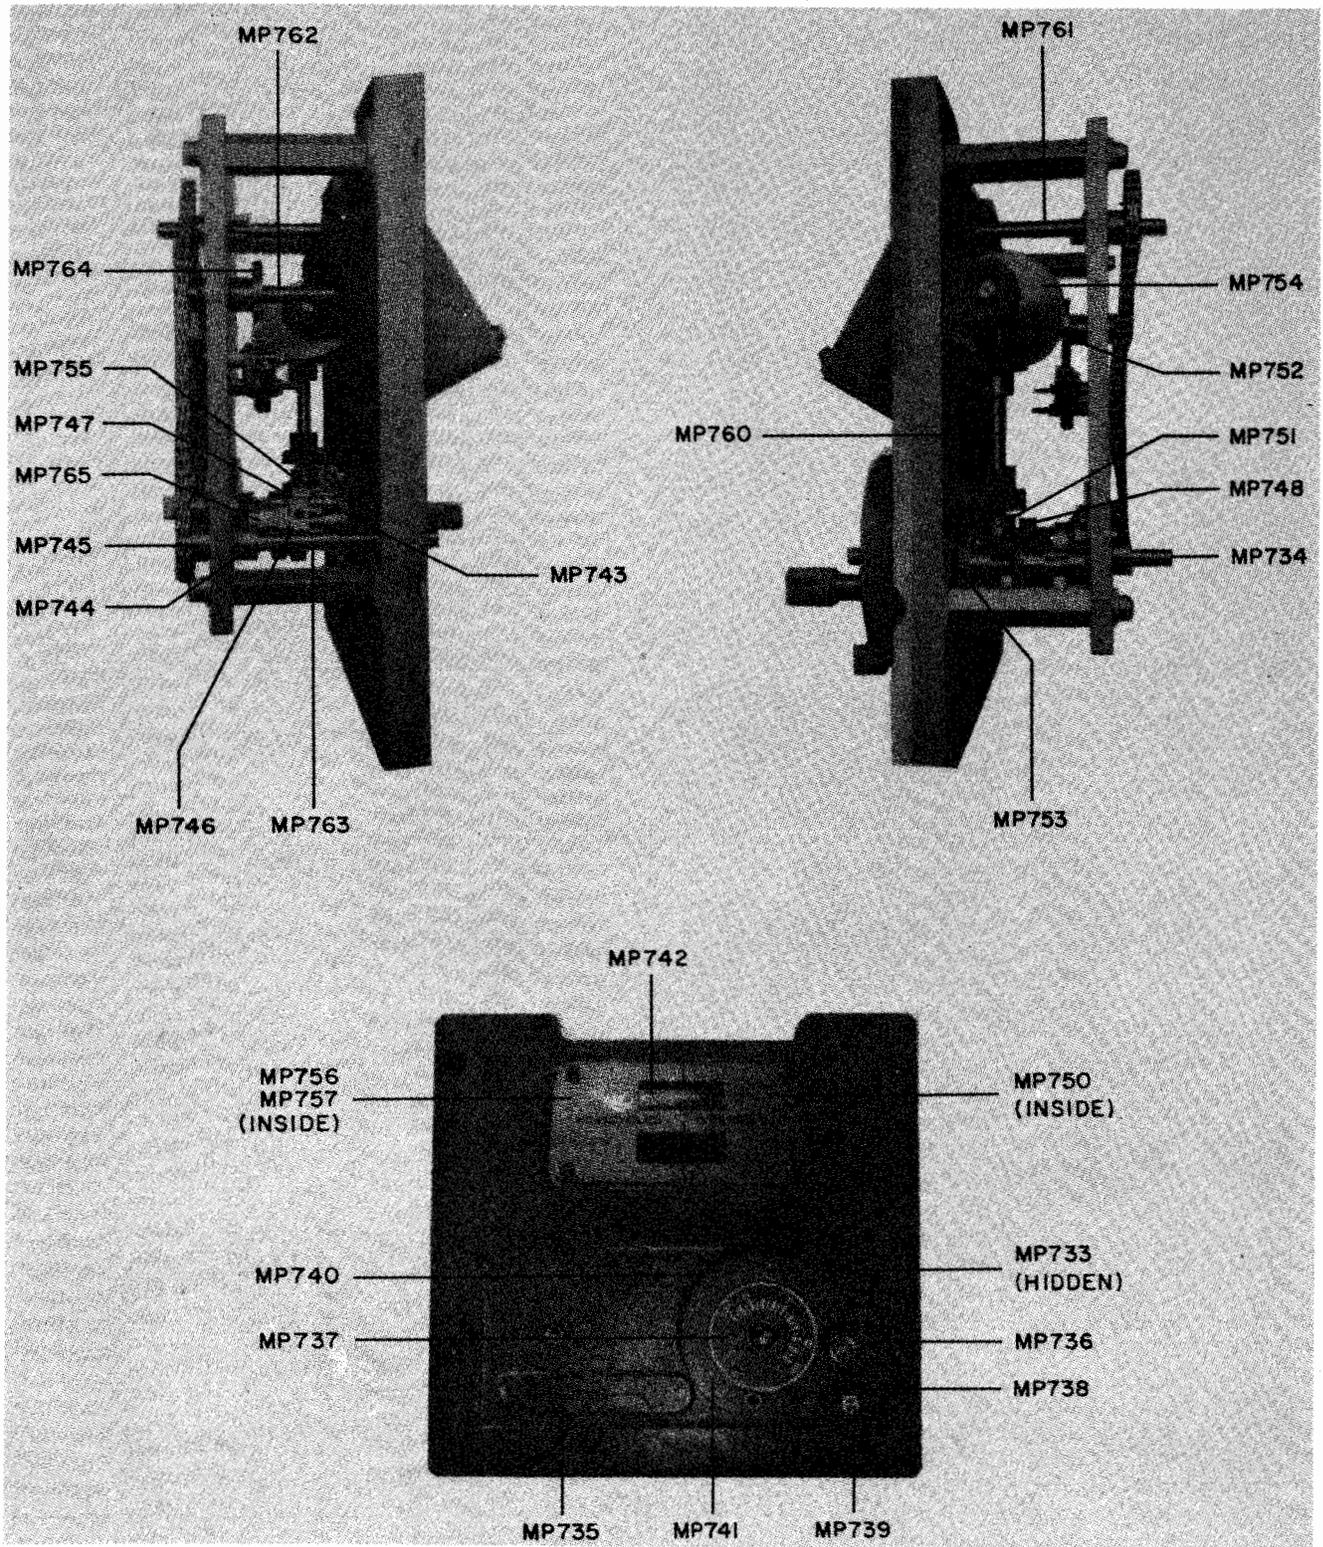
A. Electrical Frequency Control C-2764/WRT-2, Location of Parts in Gear Box, Sets, Serial Nos. A1 thru A178, D1 thru D327.
